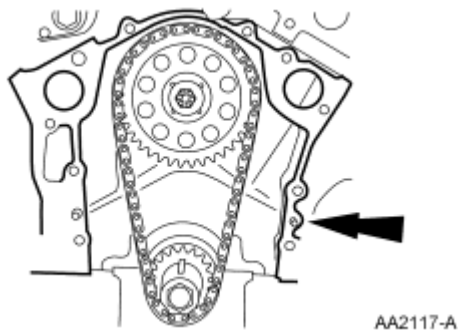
Locating Engine Front Cover Gasket & Engine Front Cover
